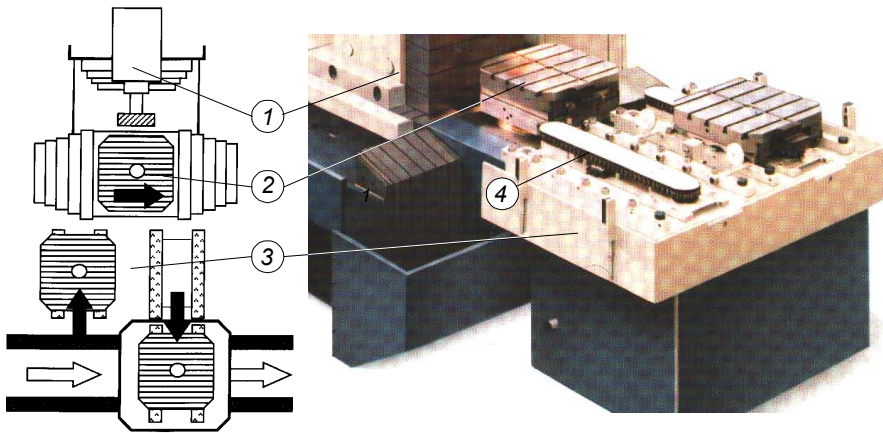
Shifting pallet changer: 1 – machining center, 2 – machine table with pallet, 3 – pallet changer, 4 – pallet shift chain mechanism
